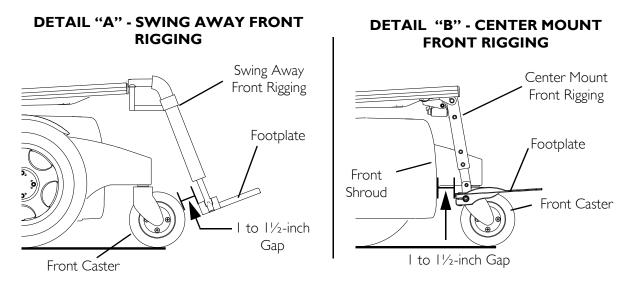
Checking ASBA Seating System Mounting Position
